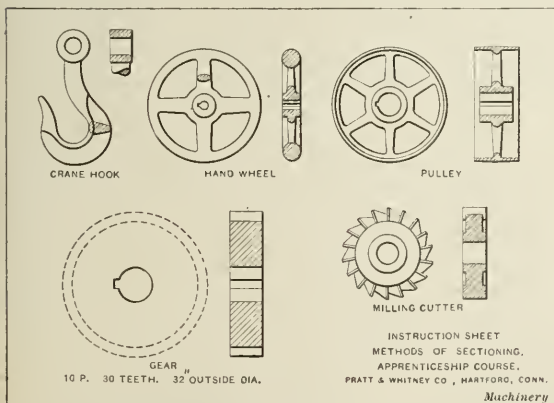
Sample of Instruction Sheet used in Mechanical Drawing Course
